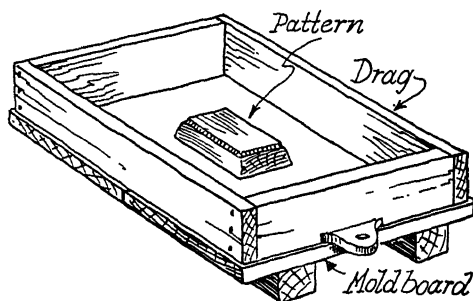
Moldboard, pattern, and drag in position ready for sand
